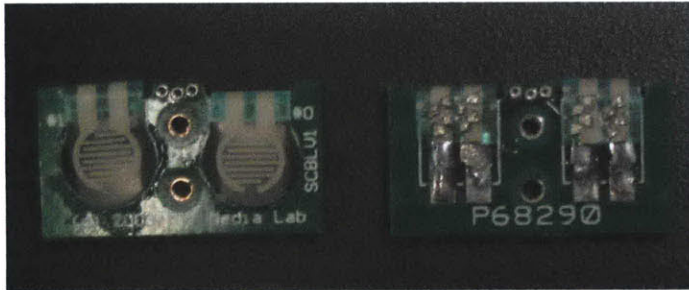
The Side circuit board. At left is the front of the circuit board. At right is back view of the circuit board.
